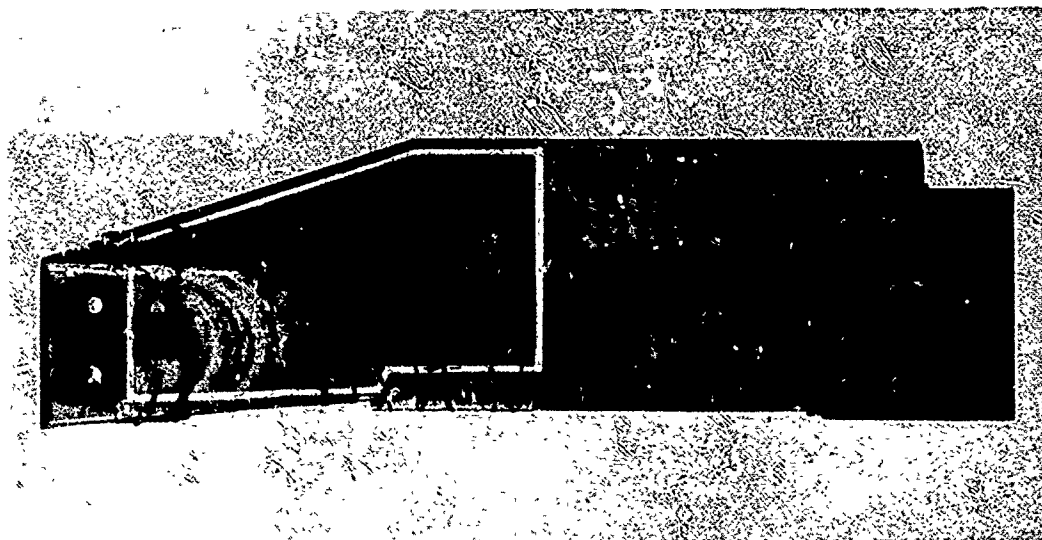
Tail Rotor Blade Root-End Test Specimen After Completion of Fatigue Loading
